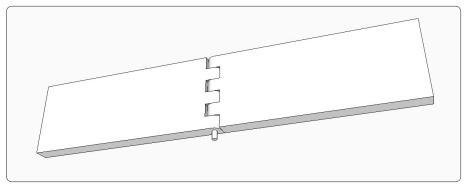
Use the Push/Pull Tool to shift the top and bottom faces of the movable hinge leaf.
